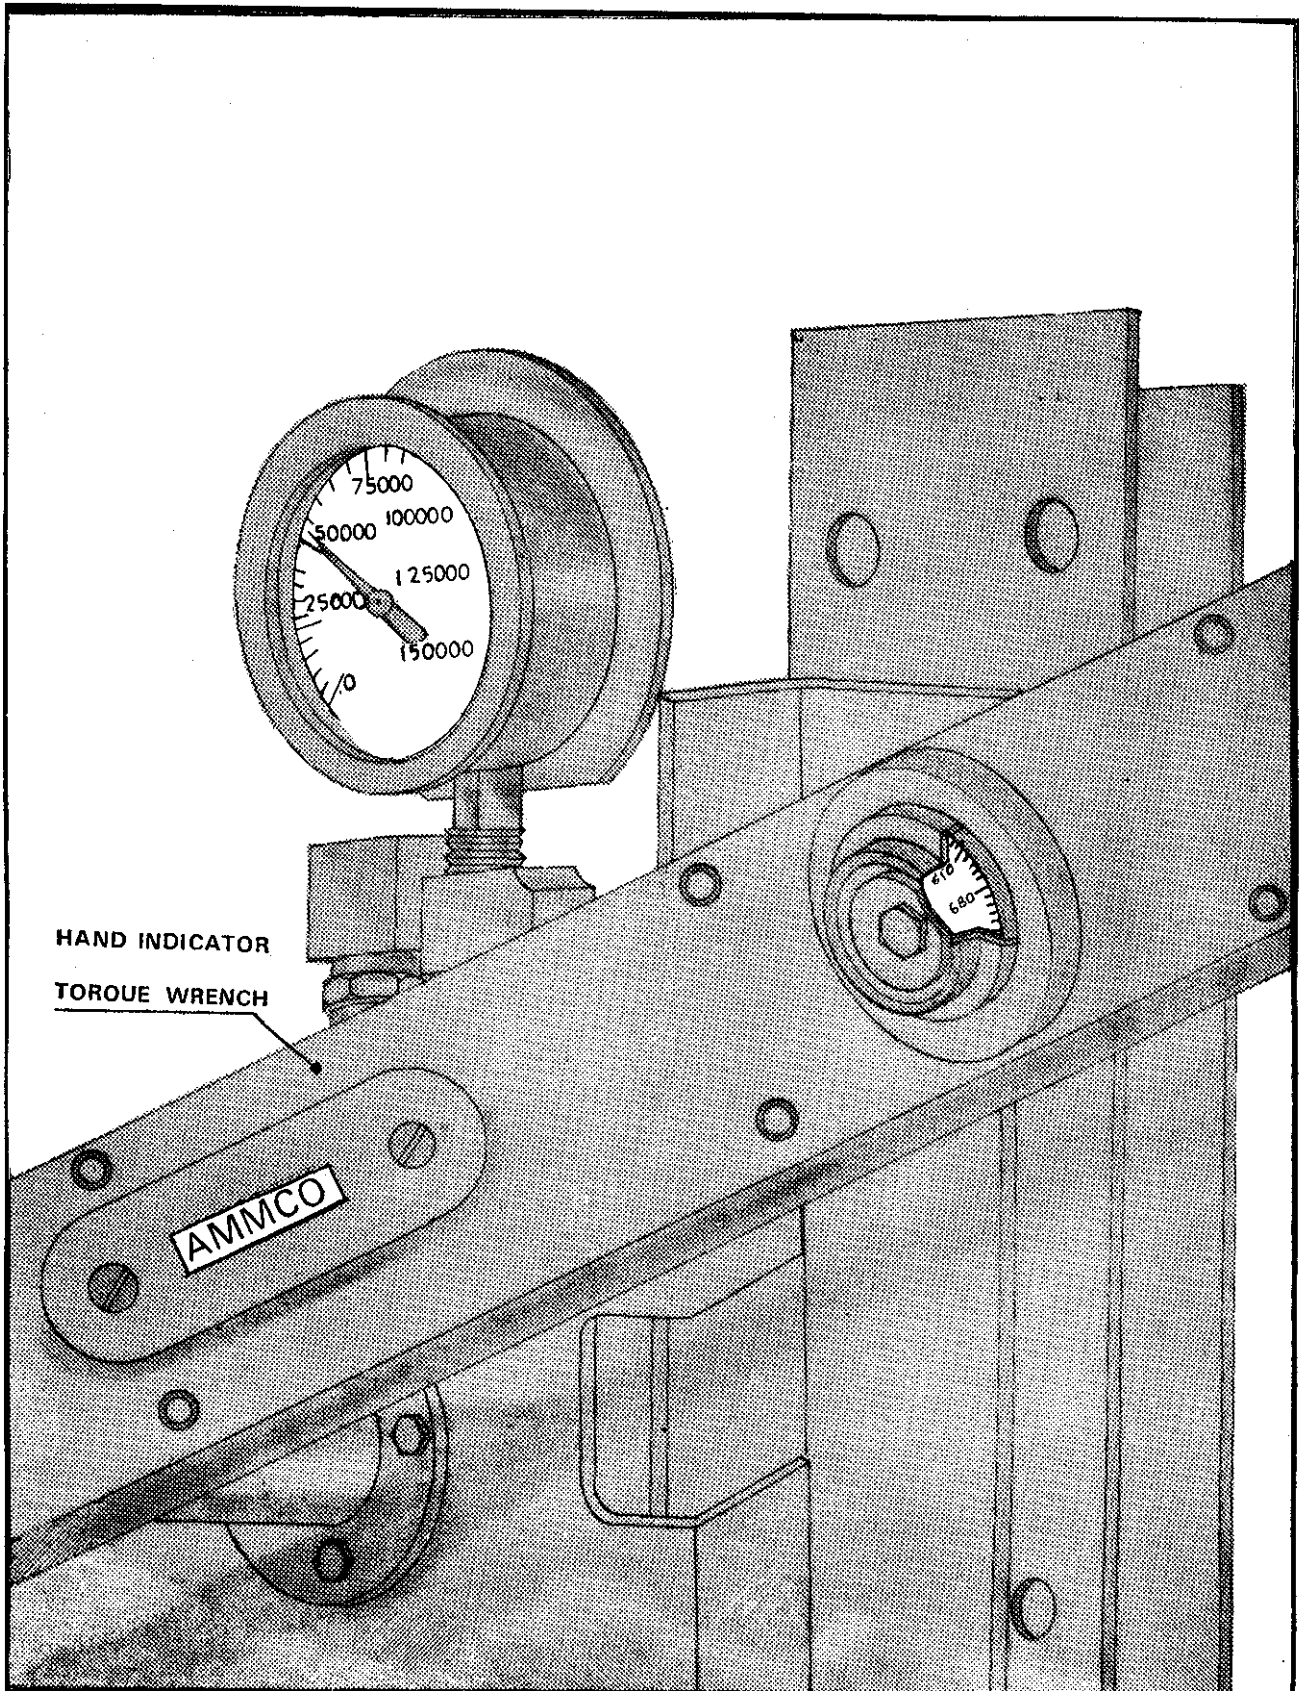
DIAL READING FOR MINIMUM SHANK TENSION
